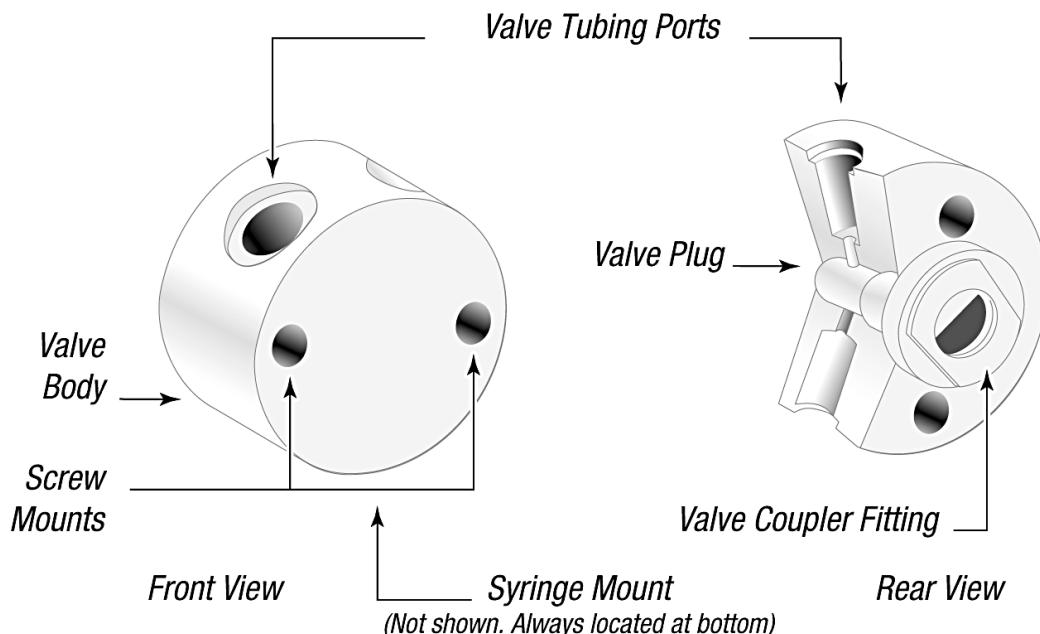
XE 1000 Valve Installation (3-Port Valve Shown)
